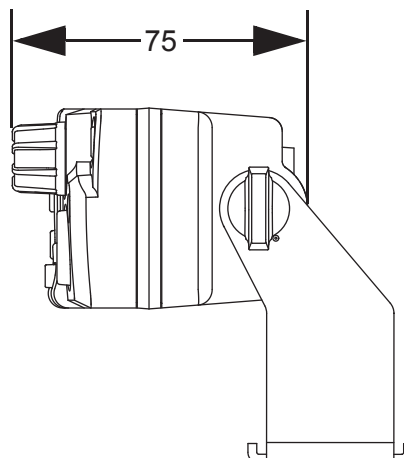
Front View of E5 Control Head with Remote Mount and Trunnion
